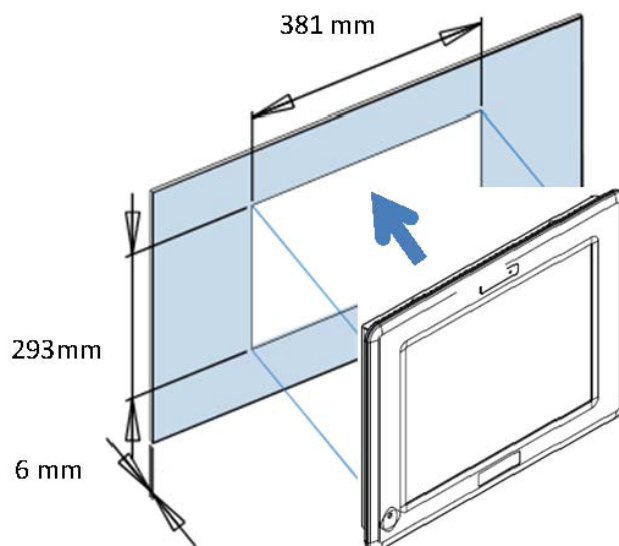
KPC-15A0 Panel Mount Cut-out hole and maximum panel thickness
